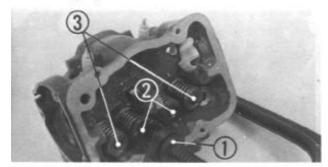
① Valve spring compressor ② Intake valve ③ Exhaust valve
